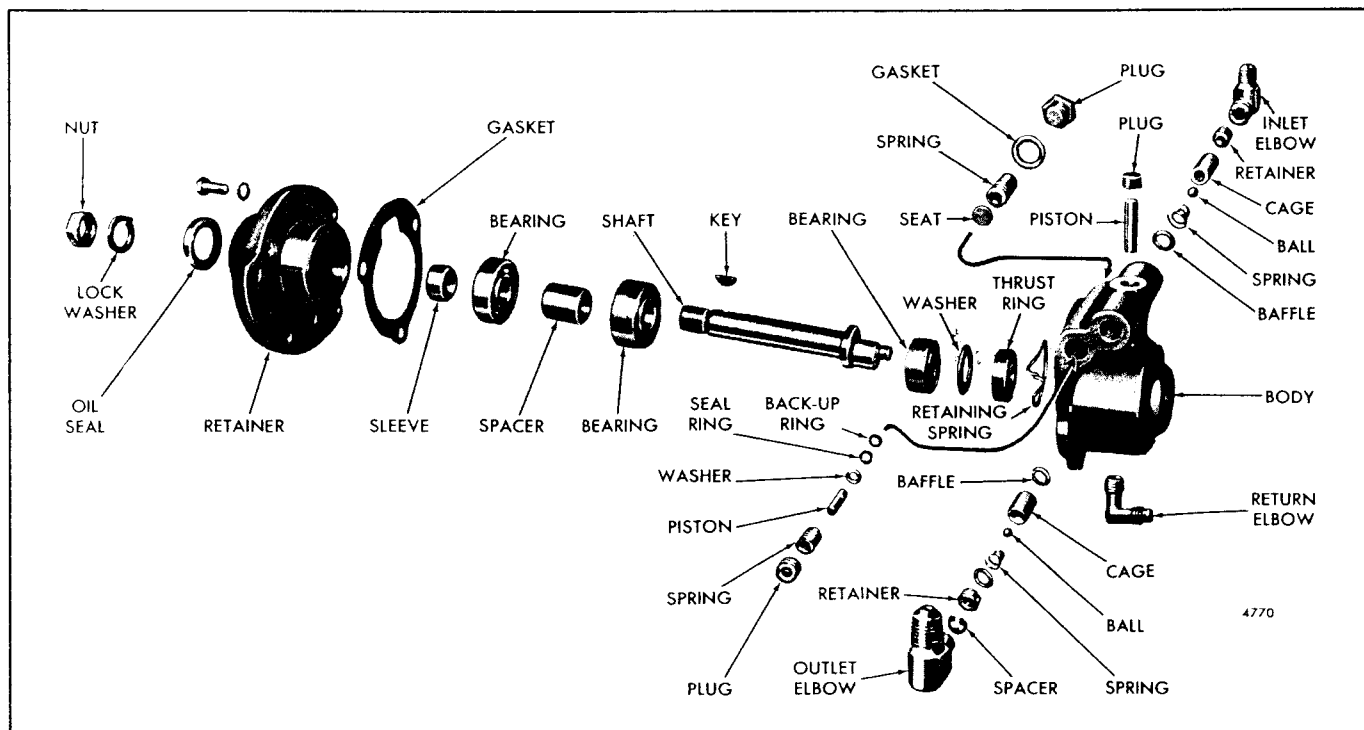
Belt-Driven Charging Pump Details and Relative Location of Parts
